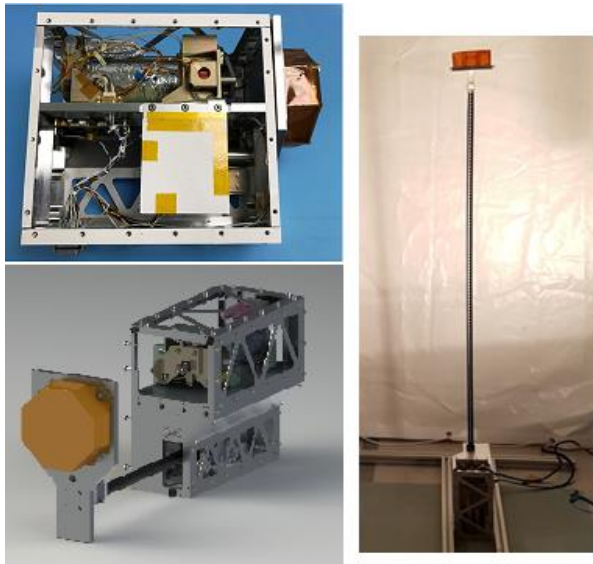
Top Left: inside the Harpoon target assembly (HTA); Bottom Left: CAD model of HTA with target partially deployed. Right: HTA with CPRF boom fully deployed during fire testing (HTA at bottom, target plate at top).
